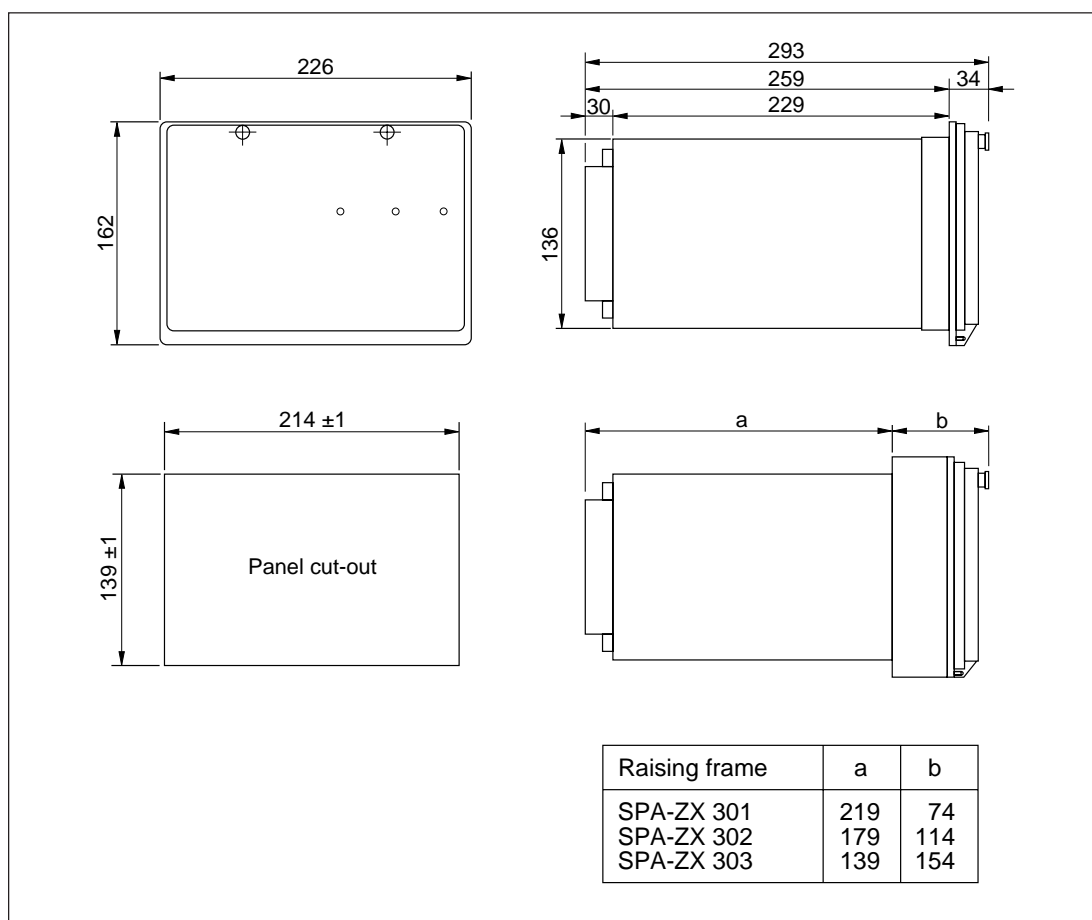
Dimension and mounting drawings for feeder protection relay SPAS 348 C
